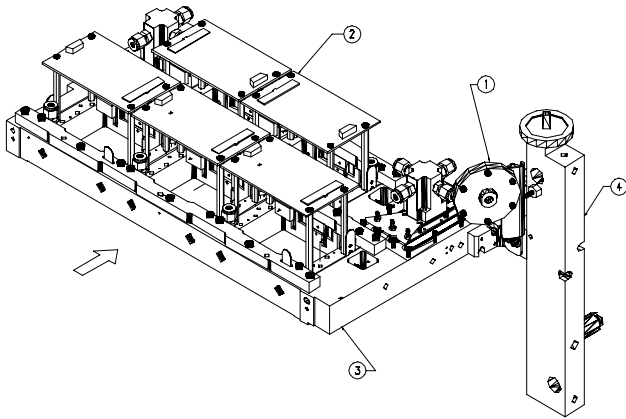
SP12.8/600 Single Pass Print Engine. 1: Last chance filter; 2: Five 2.56 inch print swaths; 3: Frame; 4: J-tube
